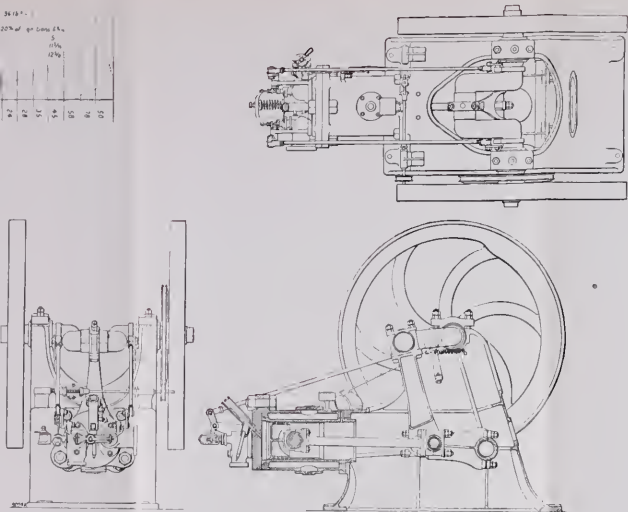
Atkinson, 1836. Section Plan, Rear Elevation and Indicator Diagram.
